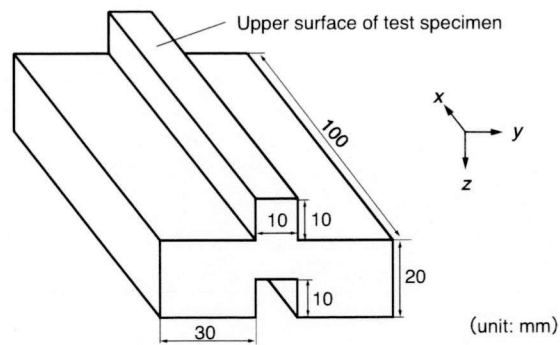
Configuration and dimensions of specimen for two-dimensional cutting.
